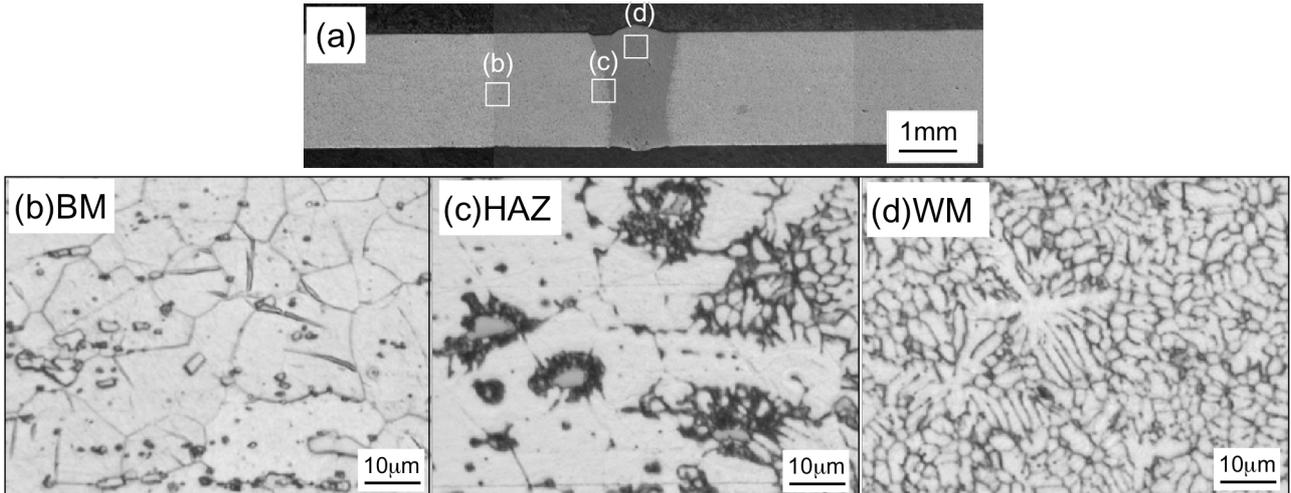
(a)Macro, (b)Base Metal, (c)Heat Affected Zone, (d)Weld Metal structures on cross-section of the welds; 3kW, 8m/min:
